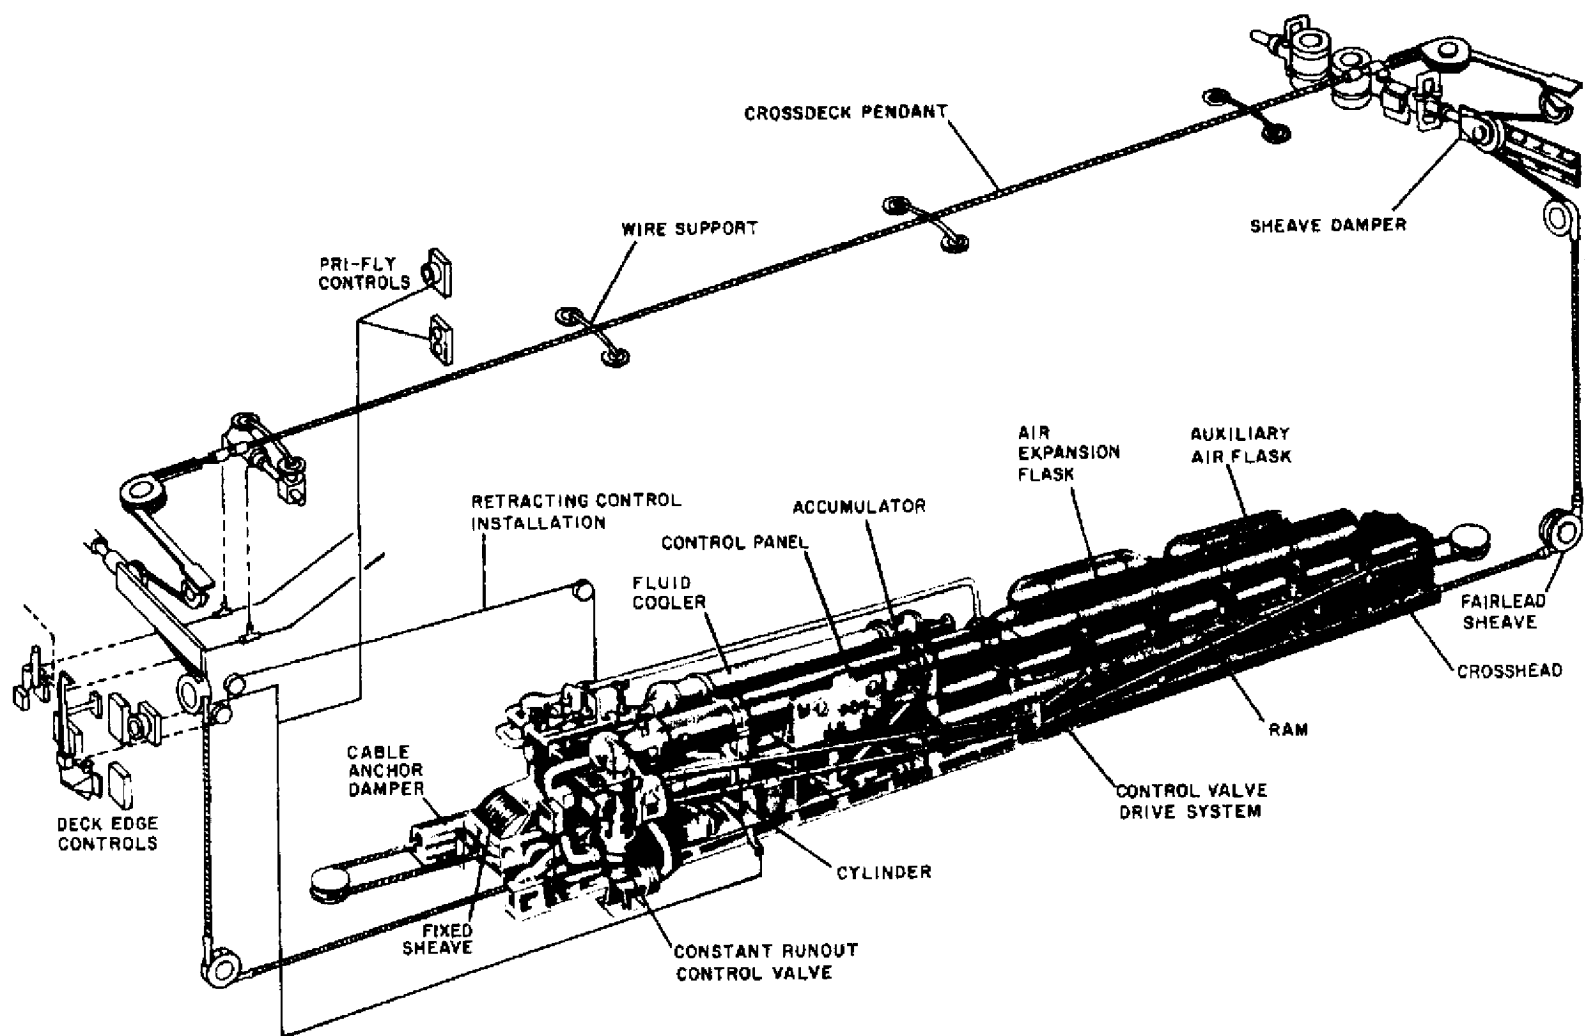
General Arrangement of Mark 7 Arresting Engine with Cooler
